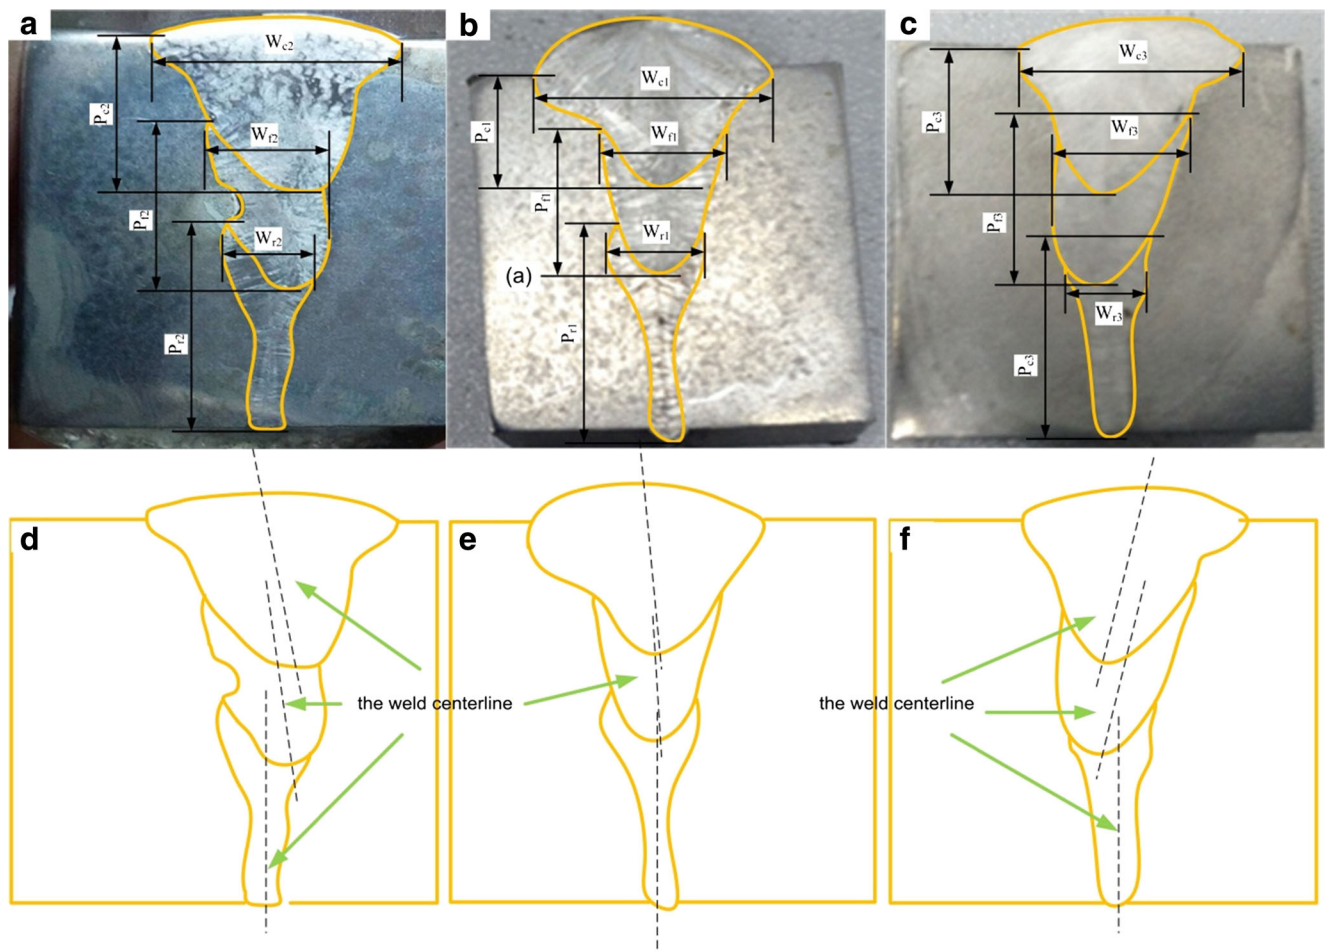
Macrotopography parameters of Invar alloy weld with different process parameters. a Test positions of specimen No. 1. b Test positions of specimen No. 2. c Test positions of specimen No. 3. d The weld
